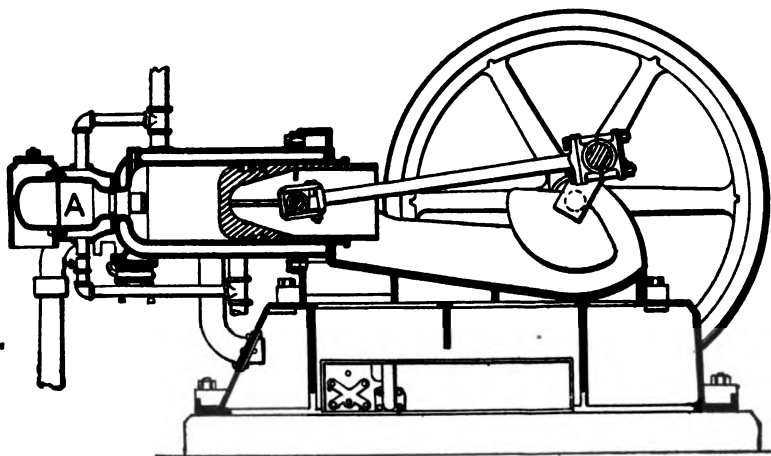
HORNSBY-AKROYD OIL ENGINE.
